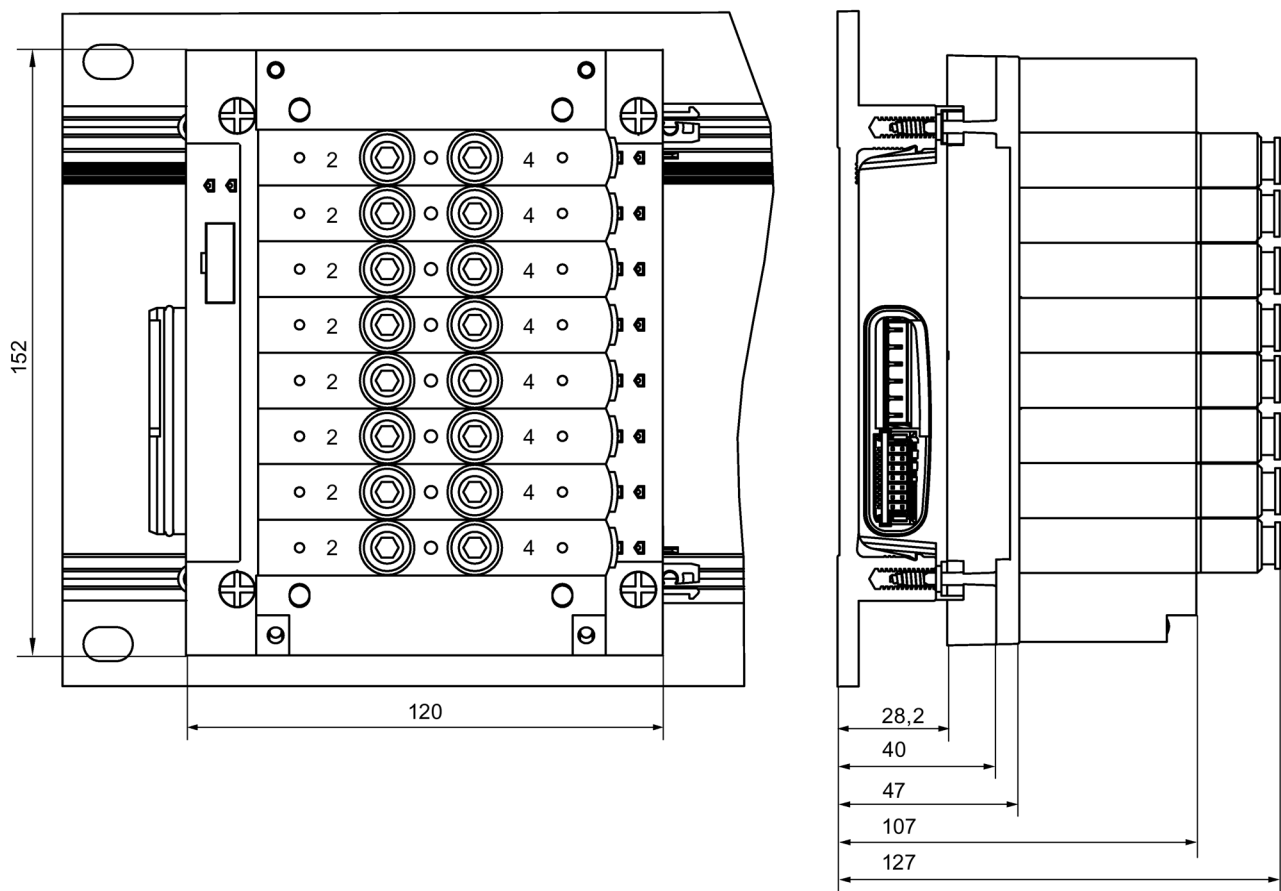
Dimension drawing of 16 DO DC 24V CPV14 pneumatic interface module with FESTO valve terminal CPV14 on compact type rack
